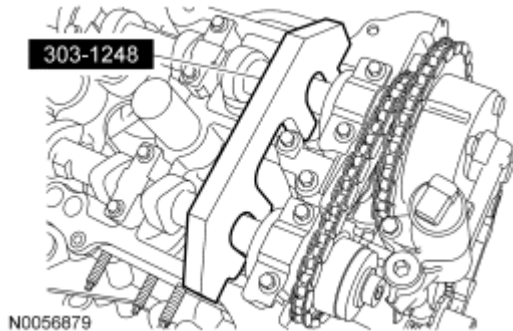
Installing Special Tool (303-1248) Onto Flats Of RH Camshafts
